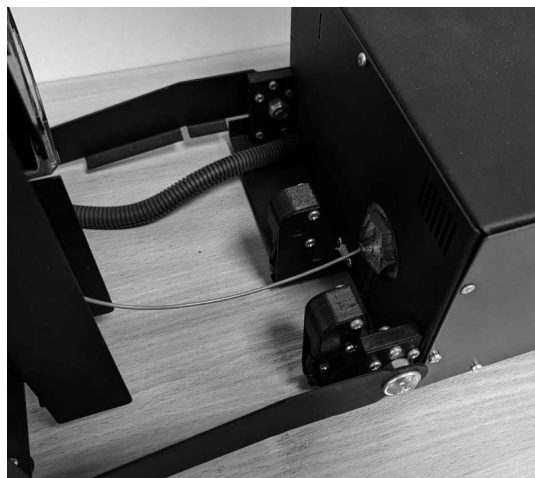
Extrusion of molten nylon through a die extrusion machine
